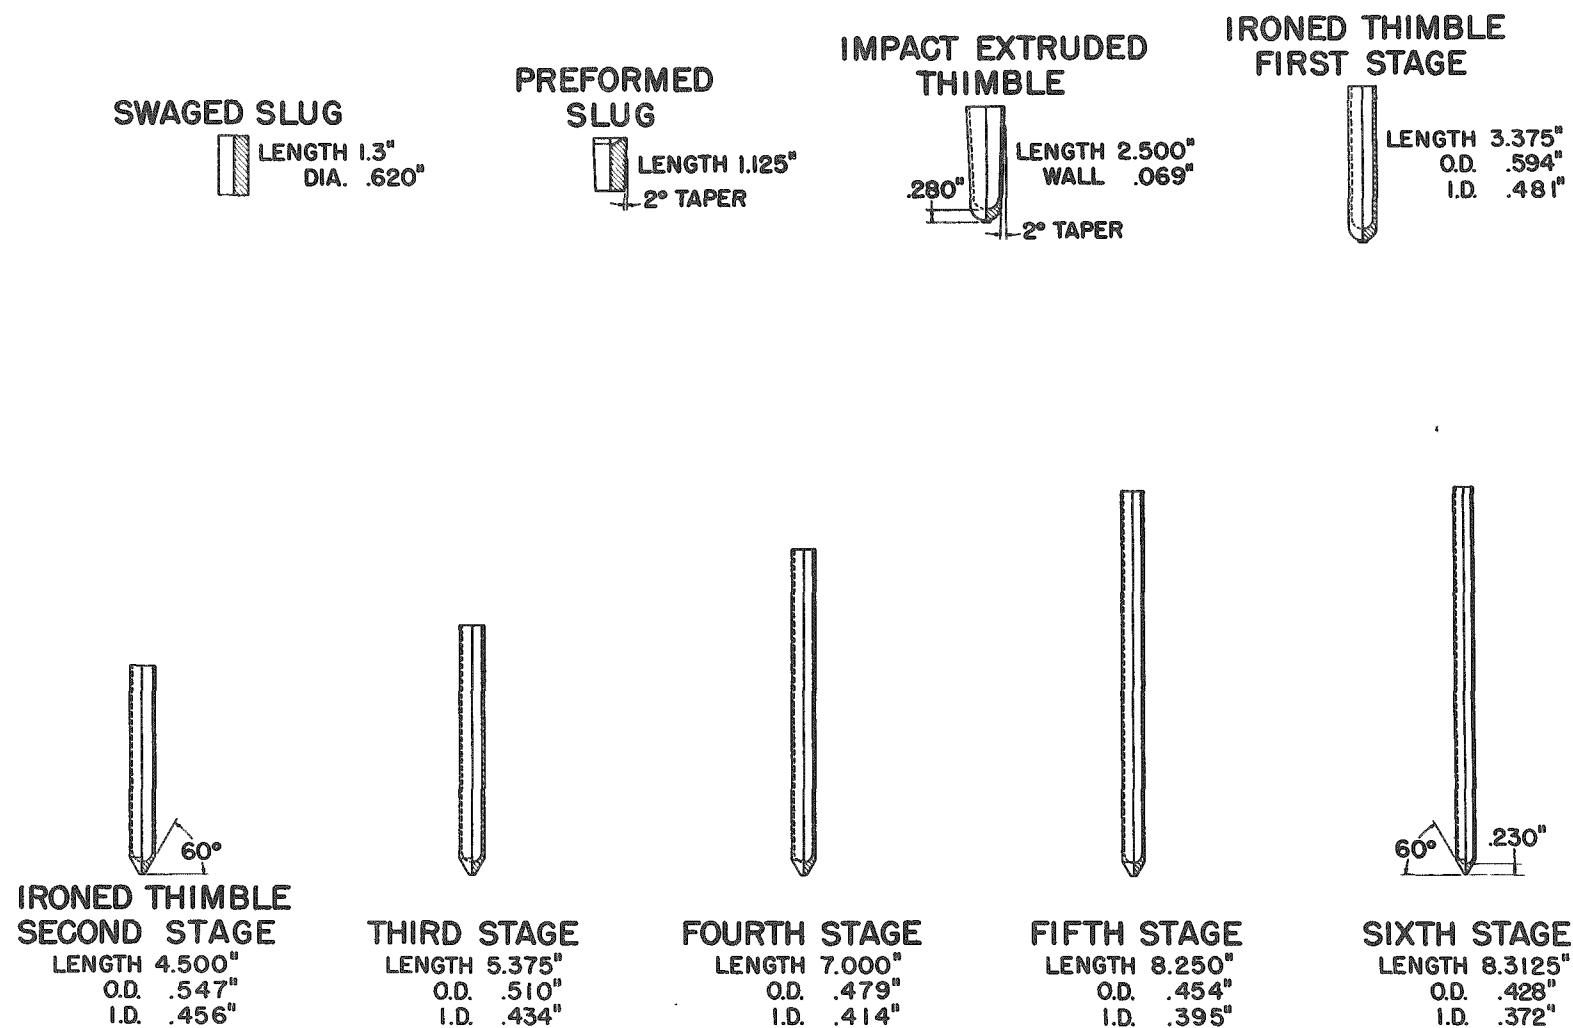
Impact extruded and ironed LAMPRE I thimbles.
